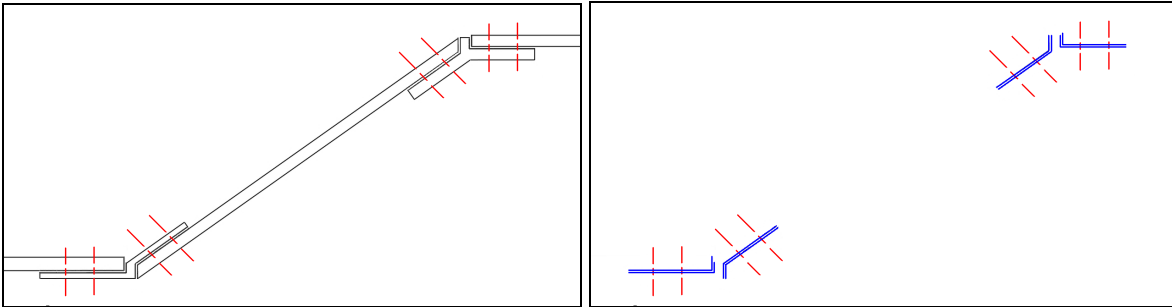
(a) Sample assembly configuration, (b) assembly interfaces/control structure.
